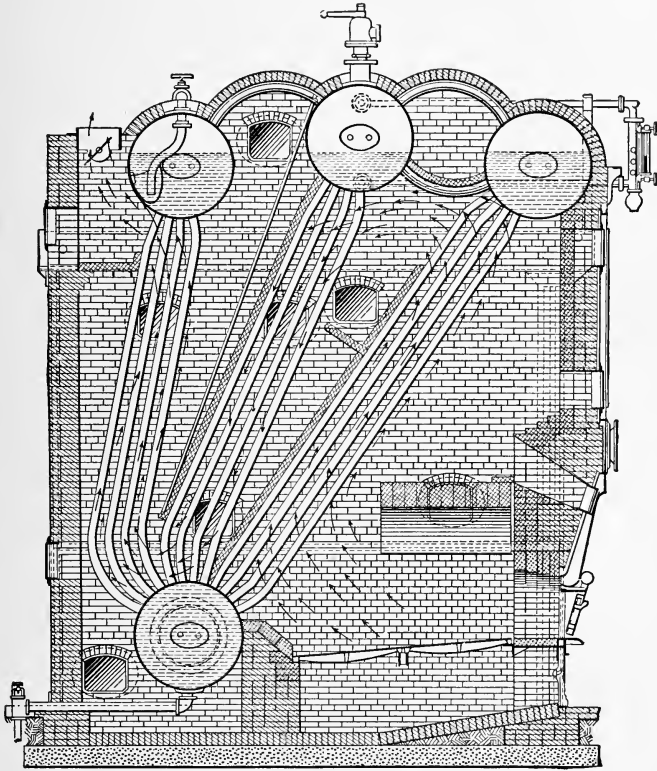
Stirling Boiler and Standard Hand-fired Setting.
